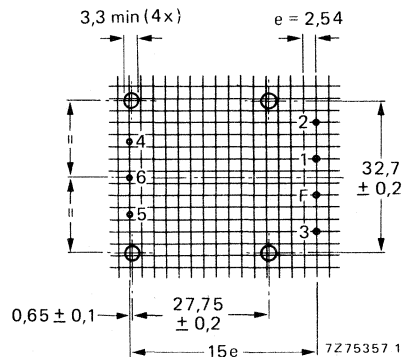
Hole pattern for mounting on a printed-wiring board; hole diameter  $1 + 0,1$  mm. Viewed from the solder side.
